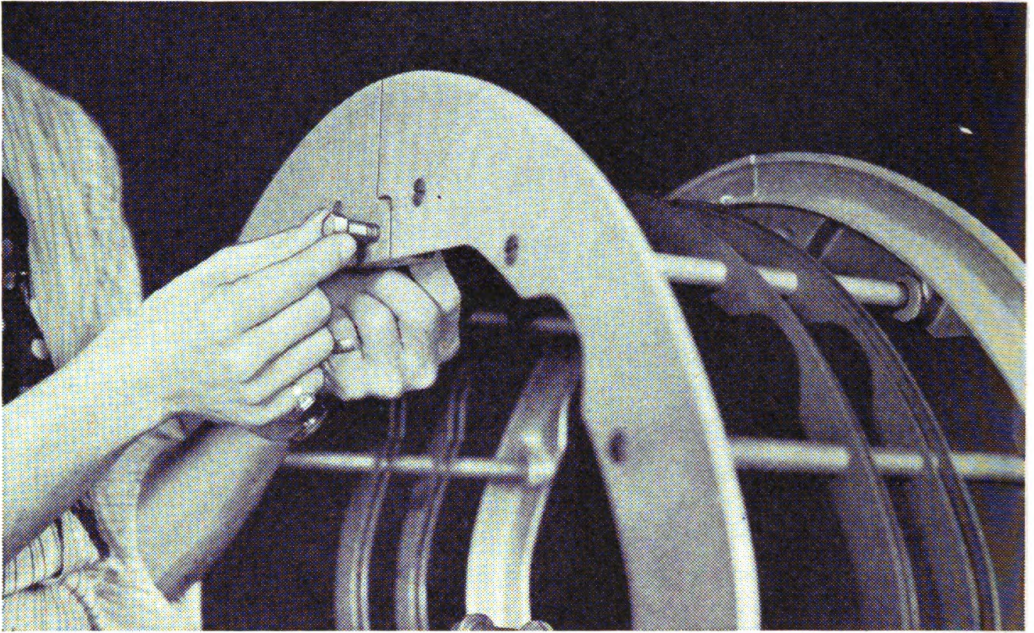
Removing bolt joining halves of 30-round magazine.
